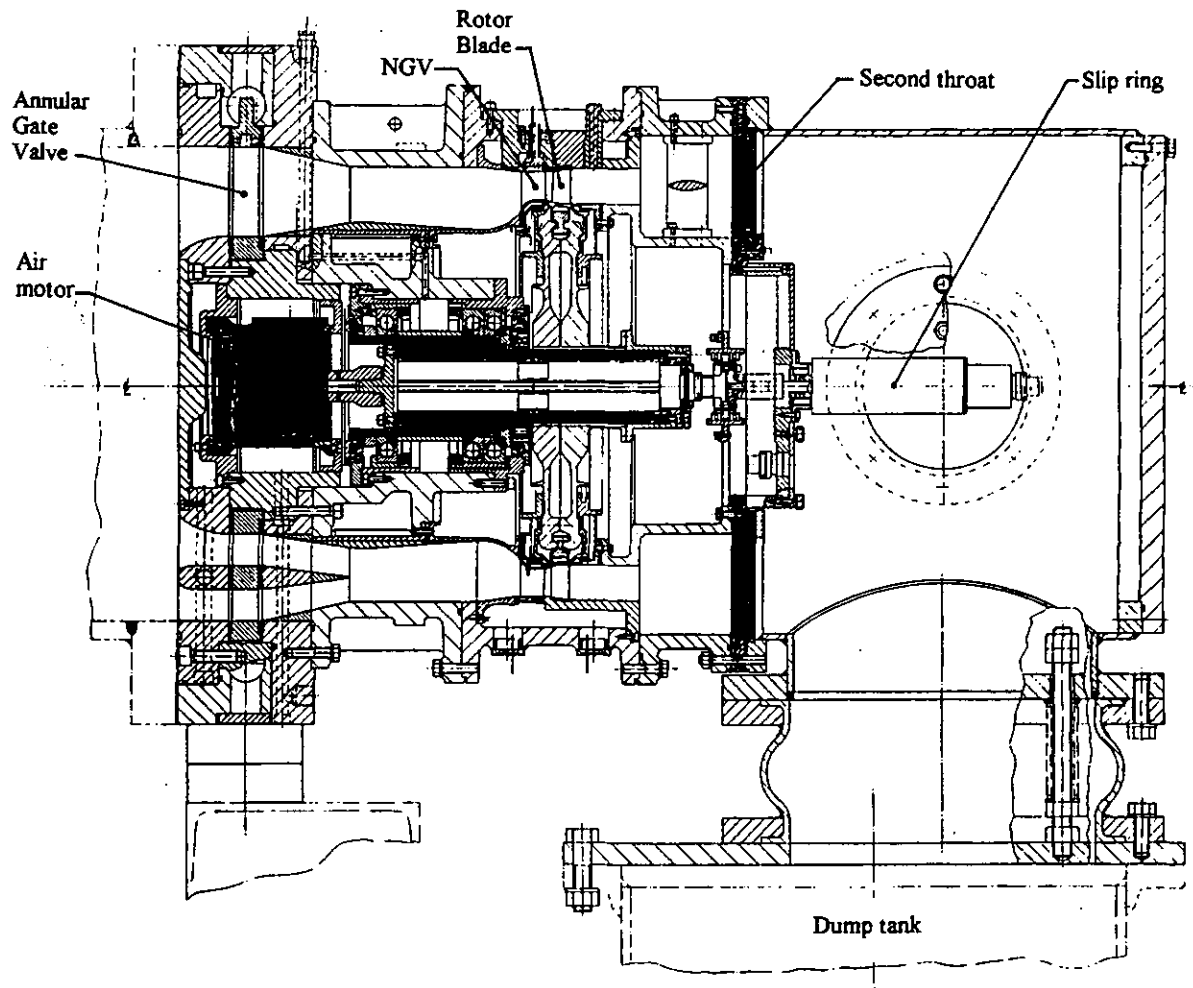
GENERAL ASSEMBLY OF THE WORKING SECTION OF THE OXFORD ROTOR PRIOR TO REMOVAL OF GUIDE VANES FOR REVERSE ROTATION.
